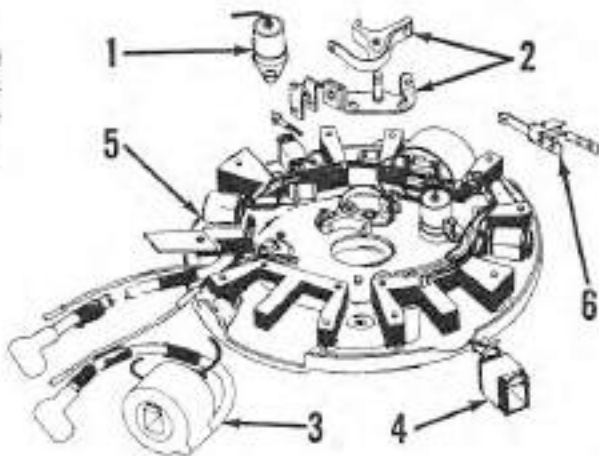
Exploded view of magneto-generator assembly used on early electric models.
